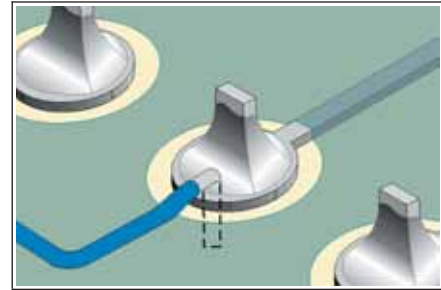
Acceptable Wire soldered into plated-through hole on solder side.
